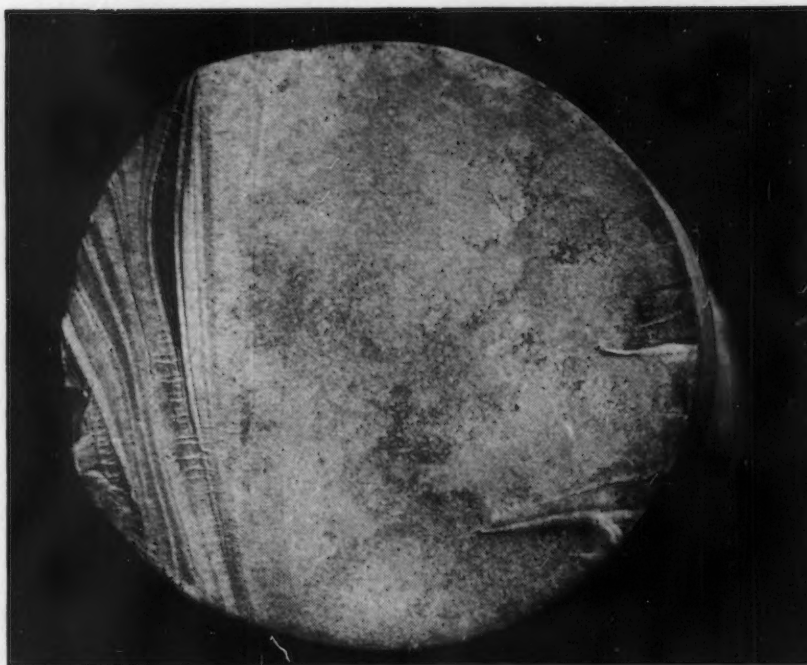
Photograph of a characteristic fatigue failure due to eccentric loading.
